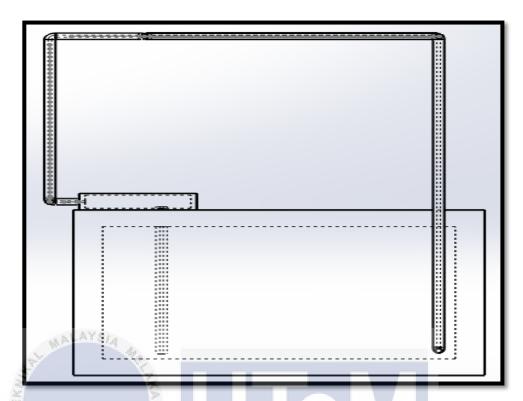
Picture of Front View Cooper Tube Installation on Upper Side of Car.
